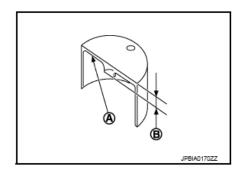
Identifying Stamp Mark And Thickness Of Valve Lifter (EXH) Courtesy of NISSAN MOTOR CO., U.S.A.
